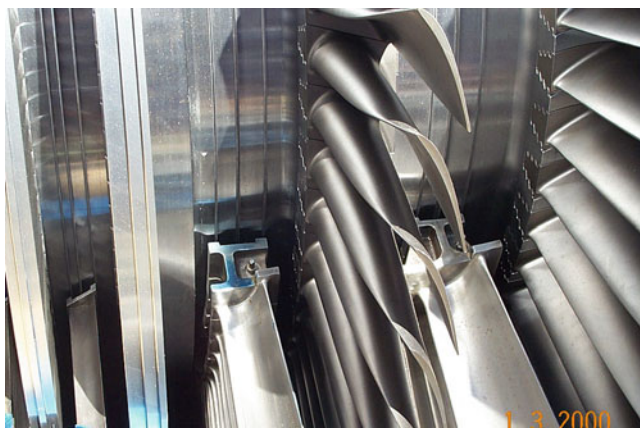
A view of LP turbine blading and its attachment (courtesy of Millmerran Operating Company, Australia)
